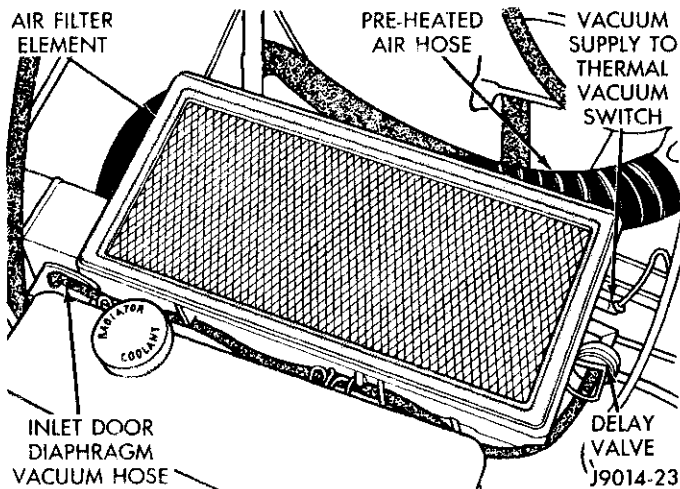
TAC Vacuum Hoses and Pre-Heated Air Hose
